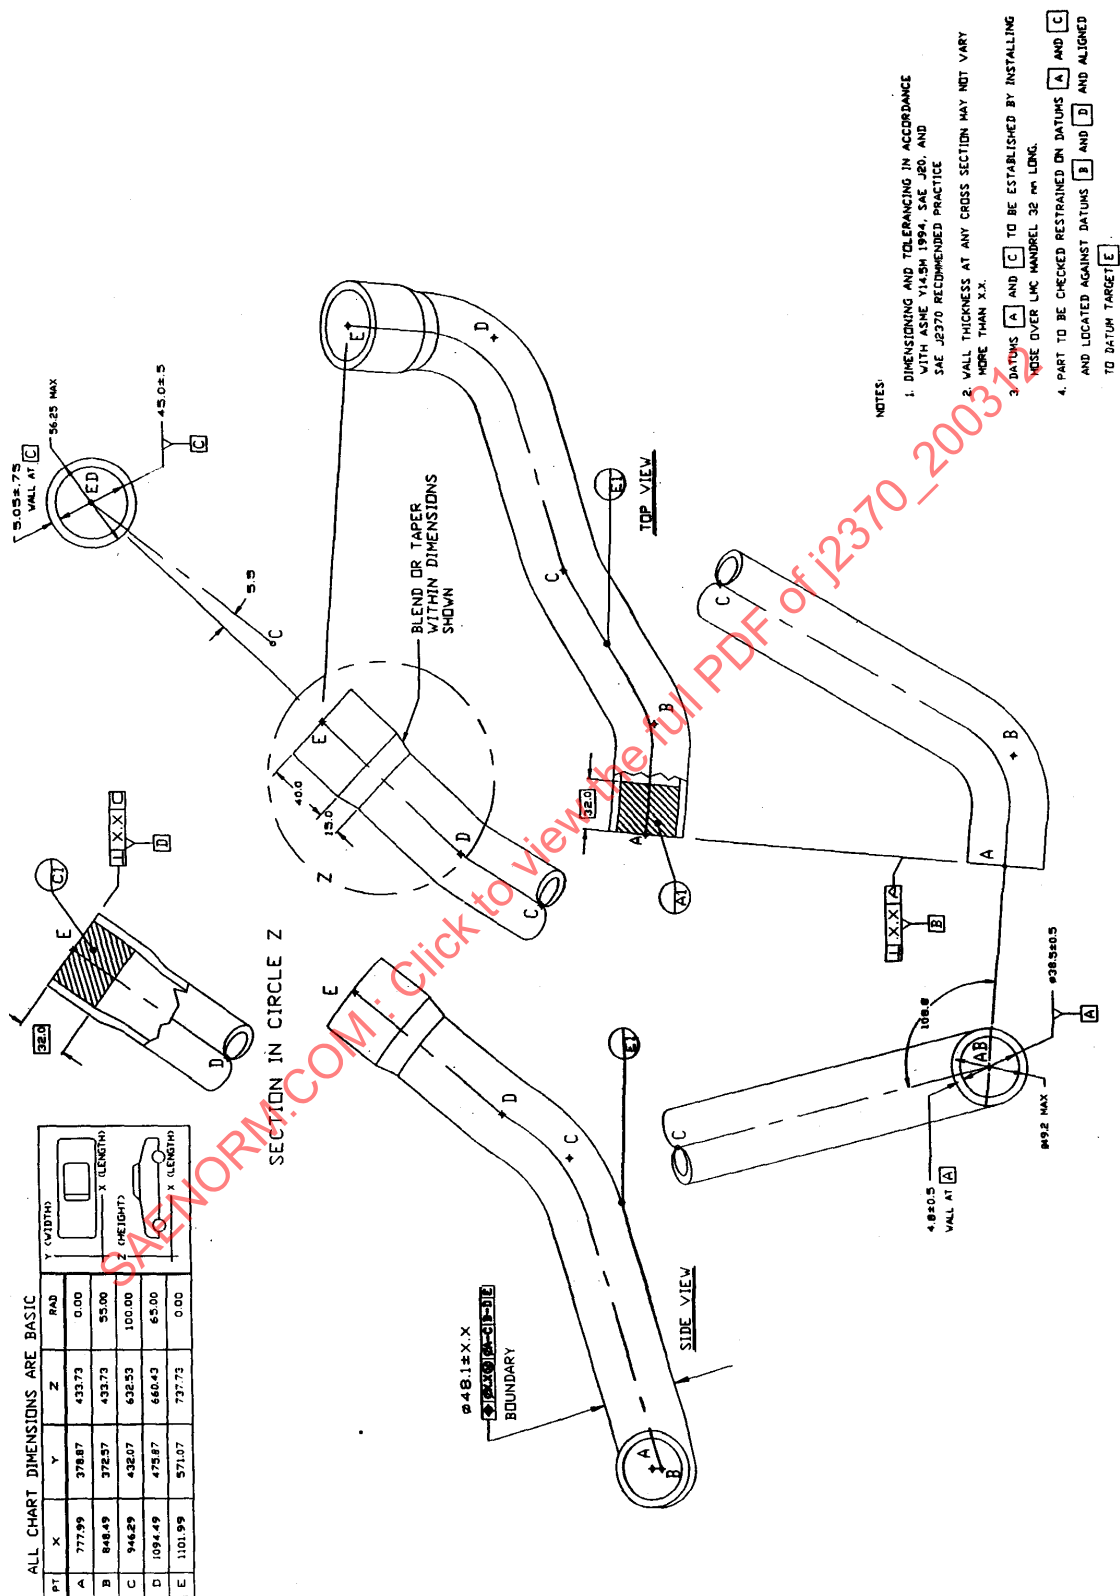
DRAWING WITH DATUM TARGETS
